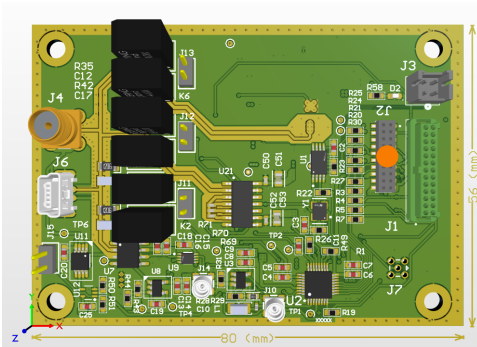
A 3D rendering of the Soldier board, one of the modular components of the PD Readout system, designed to stack with the Sergeant board.
